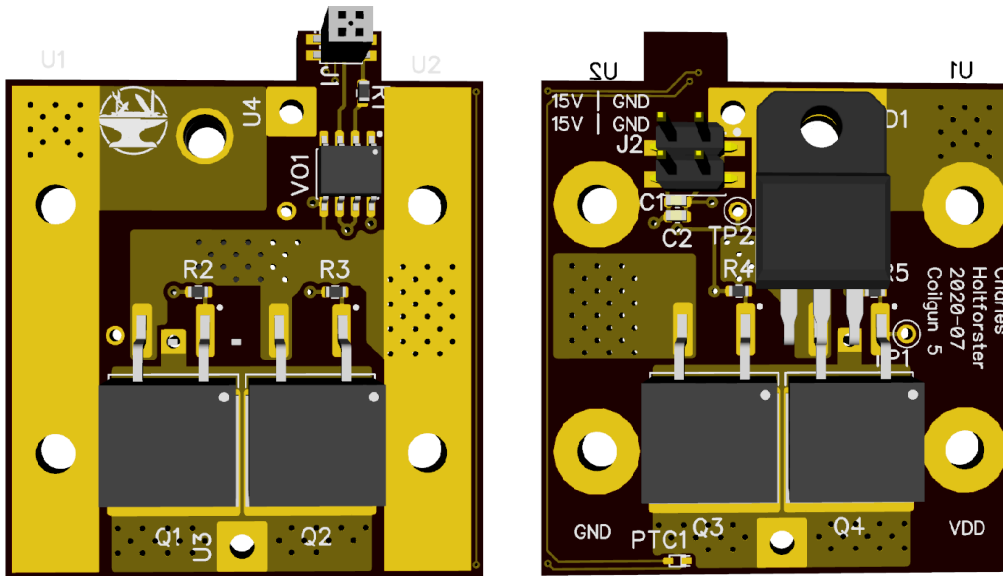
Assembled stage switch board. Top (left) and bottom (right). D1 is non-representative of installed component
